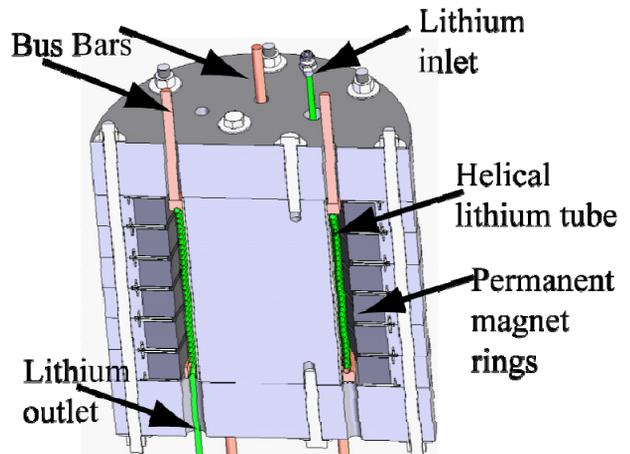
Basic elements of the DC electromagnetic pump. Four bus bars introduce the current into the helical tube. Six rings of permanent magnets produce the radial magnetic field. The magnet is completed by an inner core, two end caps and a return yoke.
